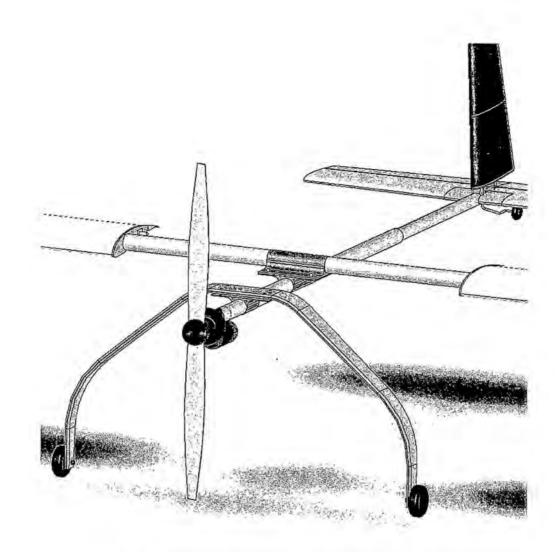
Joint connecting wing spar and landing gear to backbone
